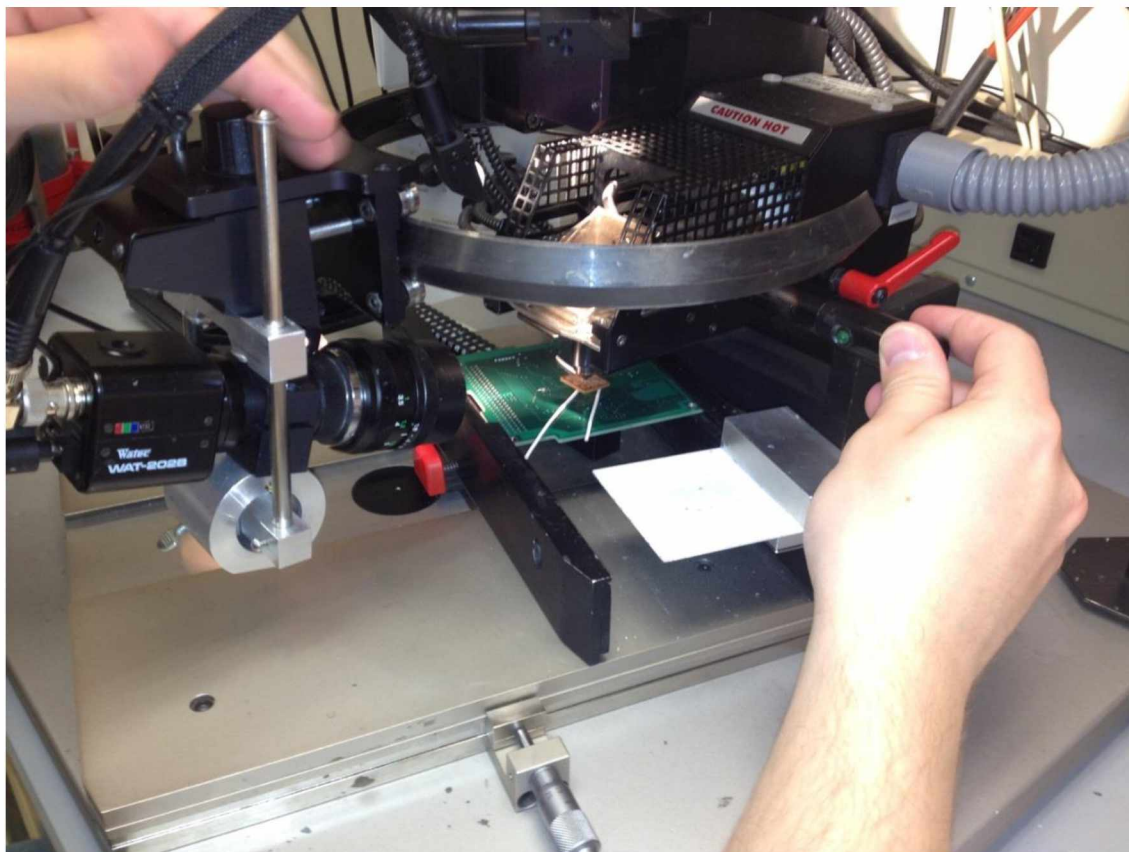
Reflow soldering machine. The first attempt at attaching the ADJD-S311 to a circuit board.
